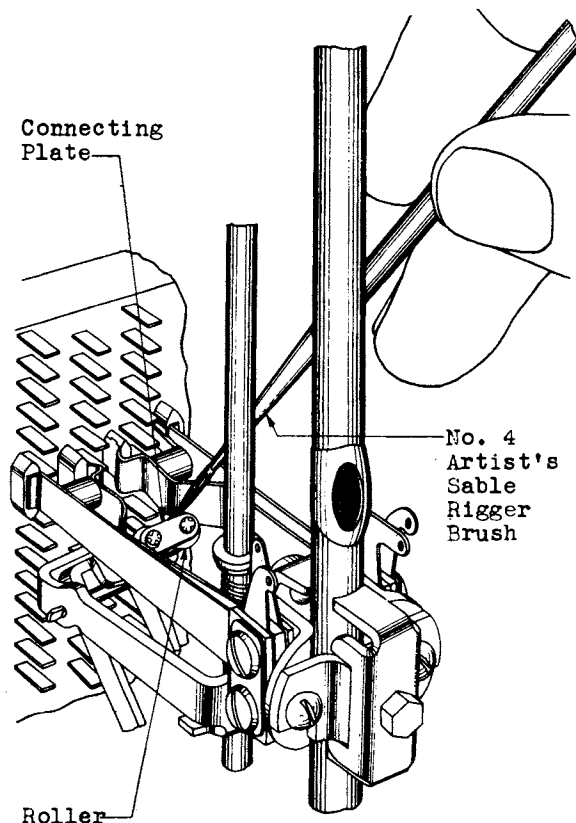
Method of Lubricating the Connecting Plate and Rollers on the Trip Lever Assembly
